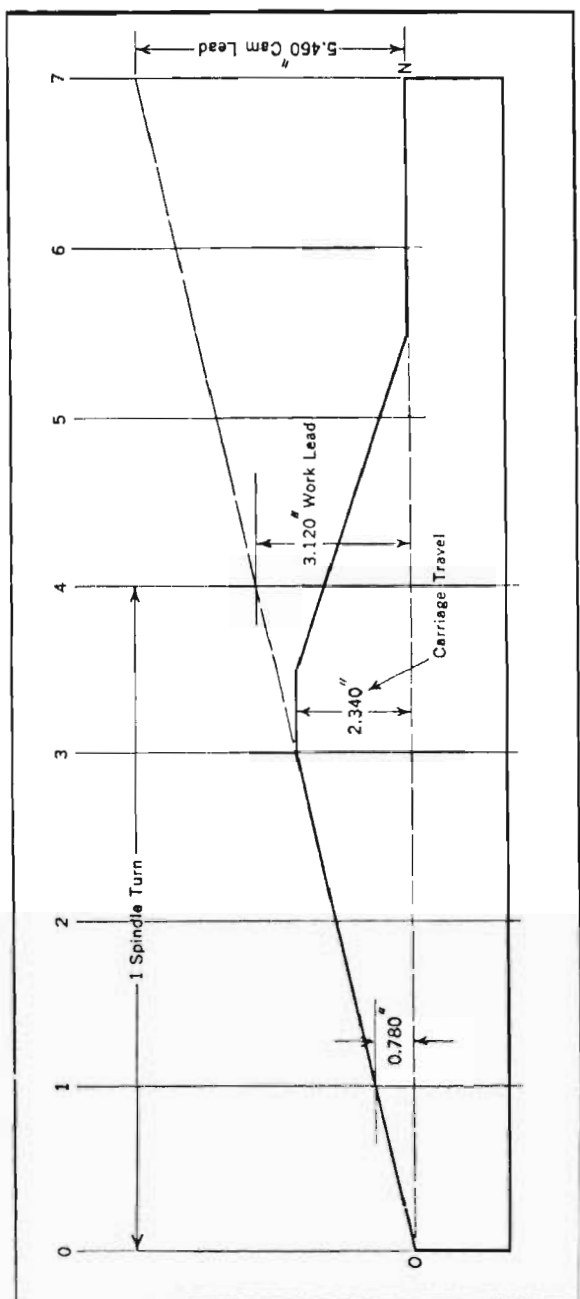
Development of Cam for Cutting Multiple Thread on Sleeve
